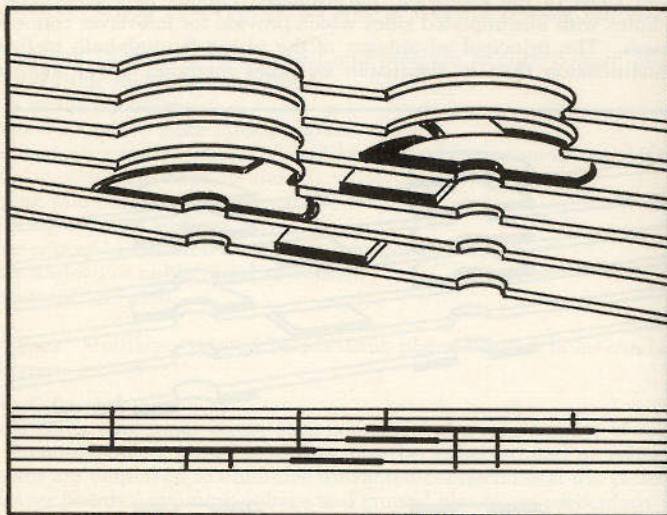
Cutaway view of typical clearance-hole construction.
